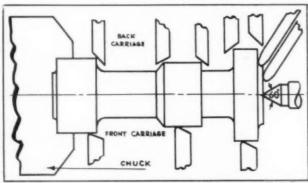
Typical tool layout for roughing operation on transmission cluster gear forging.
